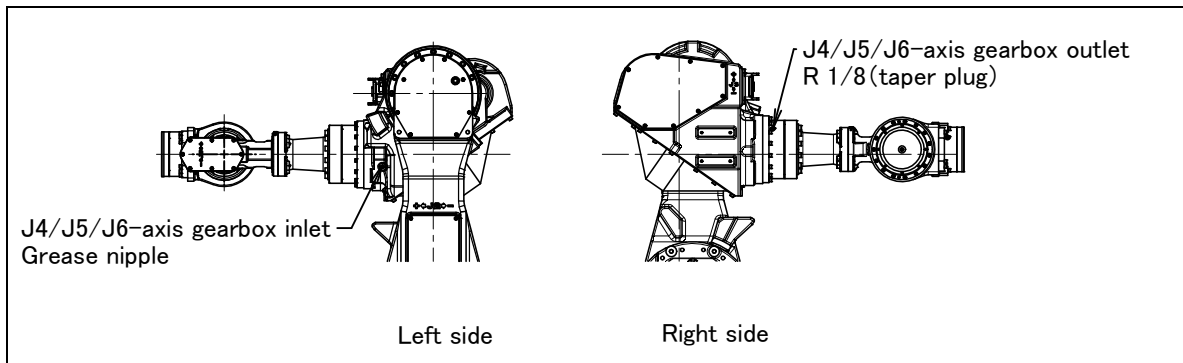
(c) Replacing grease of the J4/J5/J6-axis gearbox(M-710iC/50S)
